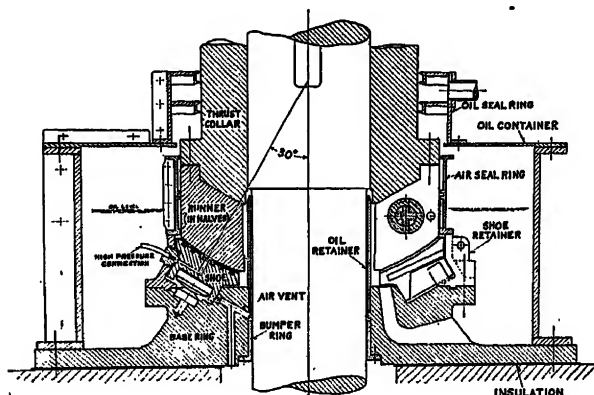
CROSS-SECTION OF KINGSBURY SPHERICAL BEARING
